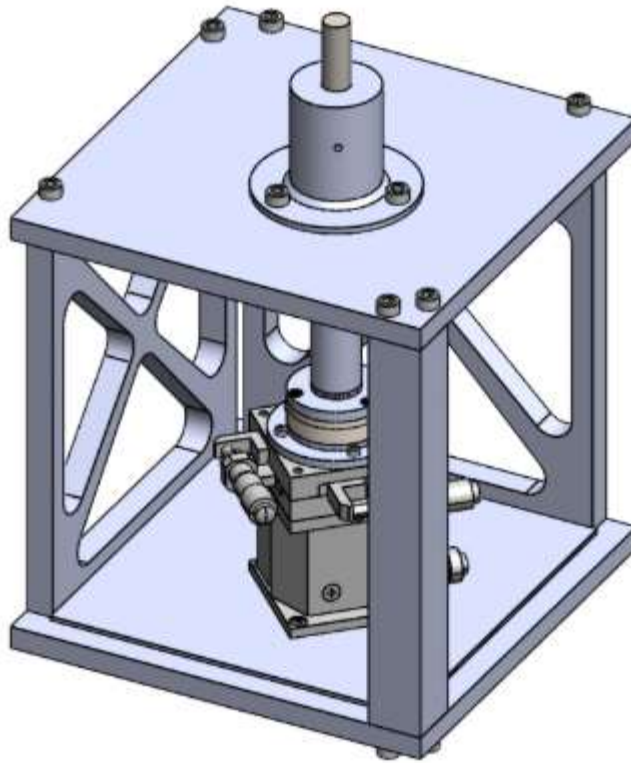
An assembly of manufactured Magnetic Force Test Rig for static testing of BLDC motor geometries
